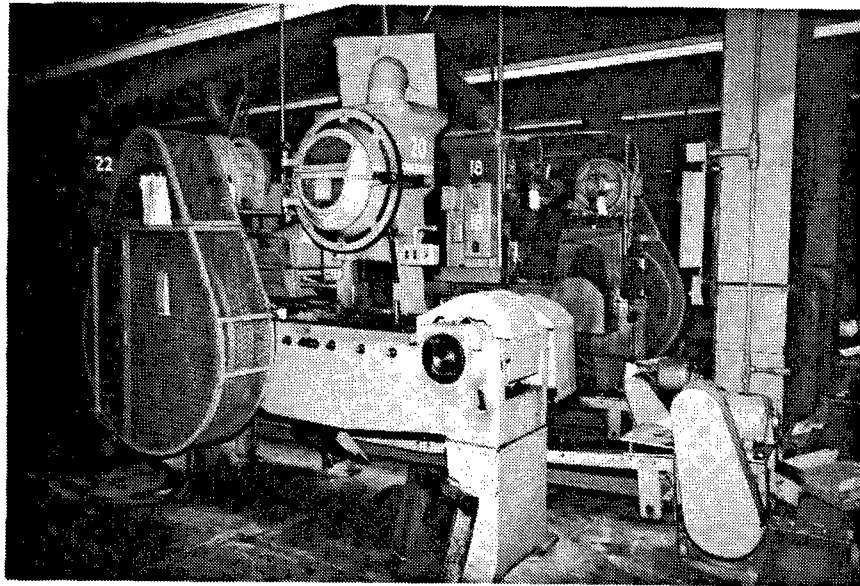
Building 102: Case Pocket (Bumping) manufactured in 1942 by the Jarecki Machine and Tool Company.
